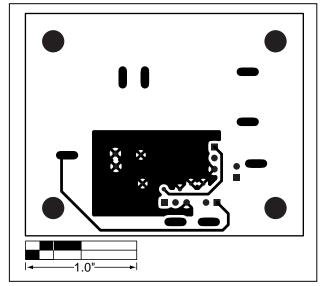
MAX1685 EV Kit PC Board Layout—Solder Side
